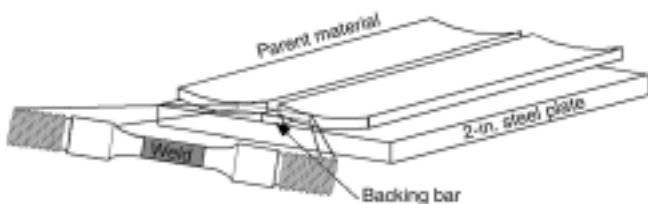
Schematic of setup for welding of plates to simulate girth welds.
